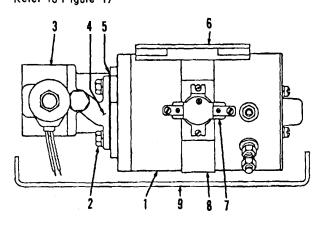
Hydraulic Pump, motor and Solenoid Release Value
